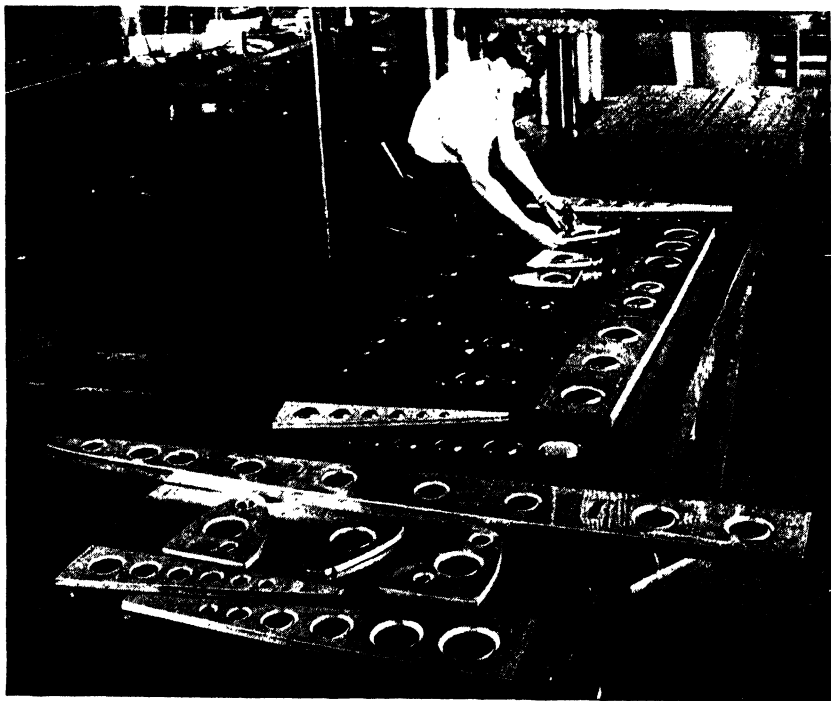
Removing formed wing ribs and outer panel trailing-edge ribs from Masonite dies at the Vought-Sikorsky Aircraft plant. The dies are attached on a plate that can be moved out of the press after the pieces are formed by the Guerin
